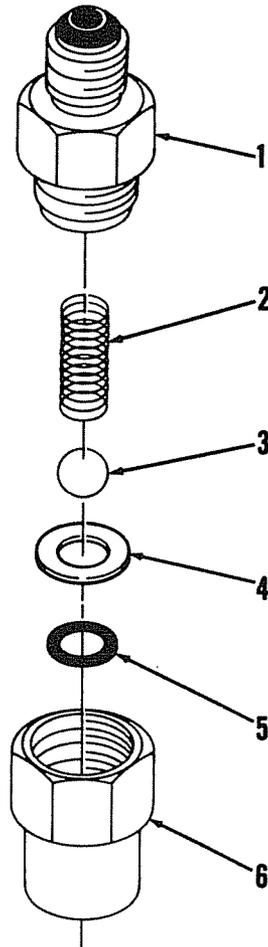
LIQUID CHECK VALVE ASSEMBLY
